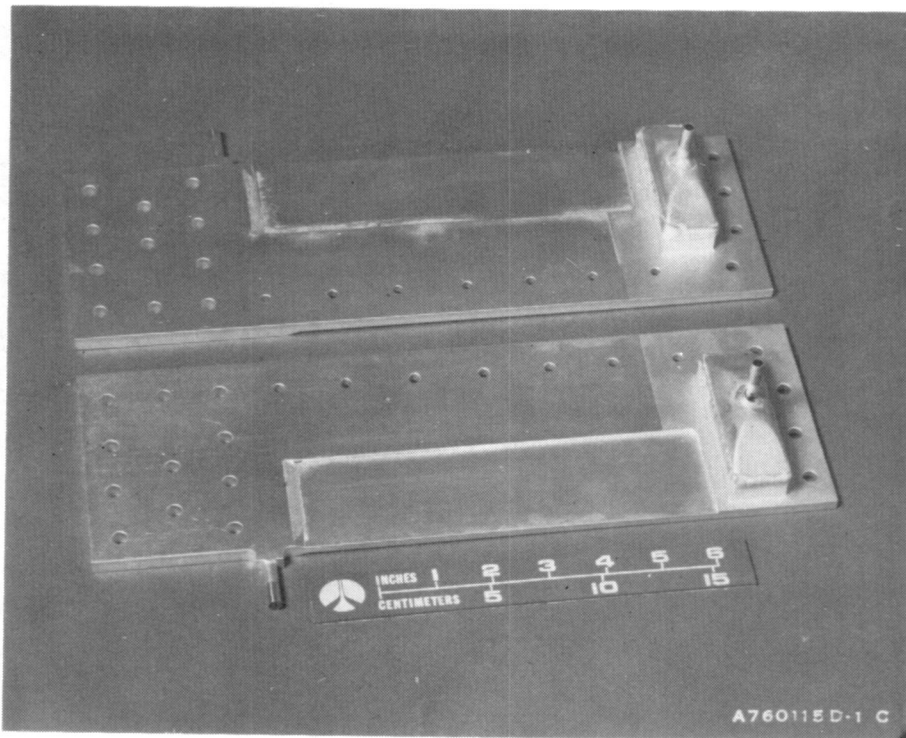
PCS Inboard Side of Two Panels after all Welding, Heat Treatment and Finish Machining. Integrally Fabricated Tubes Form Manifolds.
